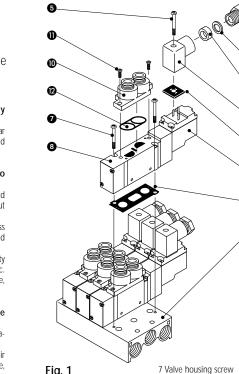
Body ported type 8 Valve body 9 Mounting gasket 1 Gland nut 10 Port block 11 Mounting screw 12 Gasket 13 Solenoid pilot 14 Bar manifold
